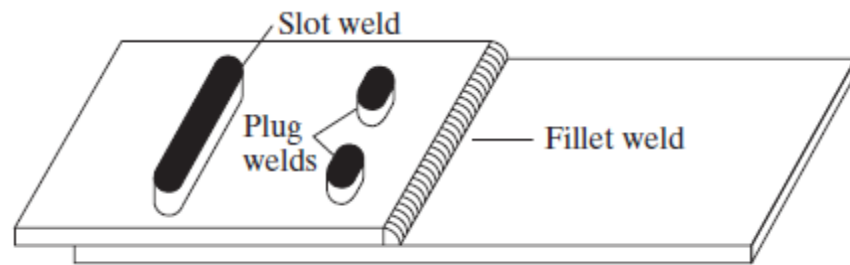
Connecting web doubler plates with plug welds.
